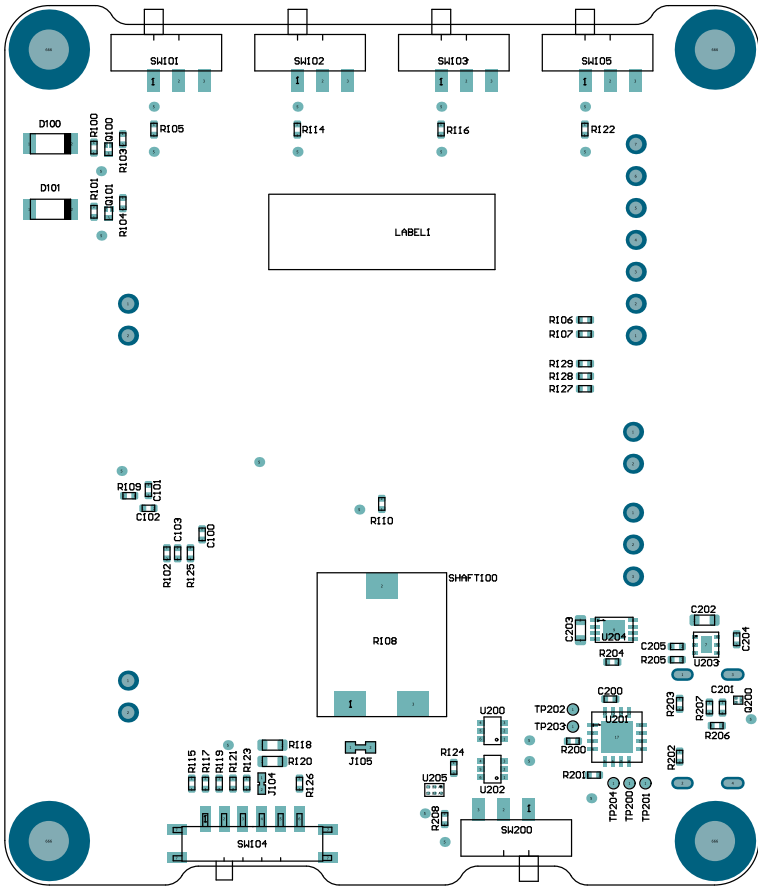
MTCH9010 Evaluation Kit Sensors Top Assembly
